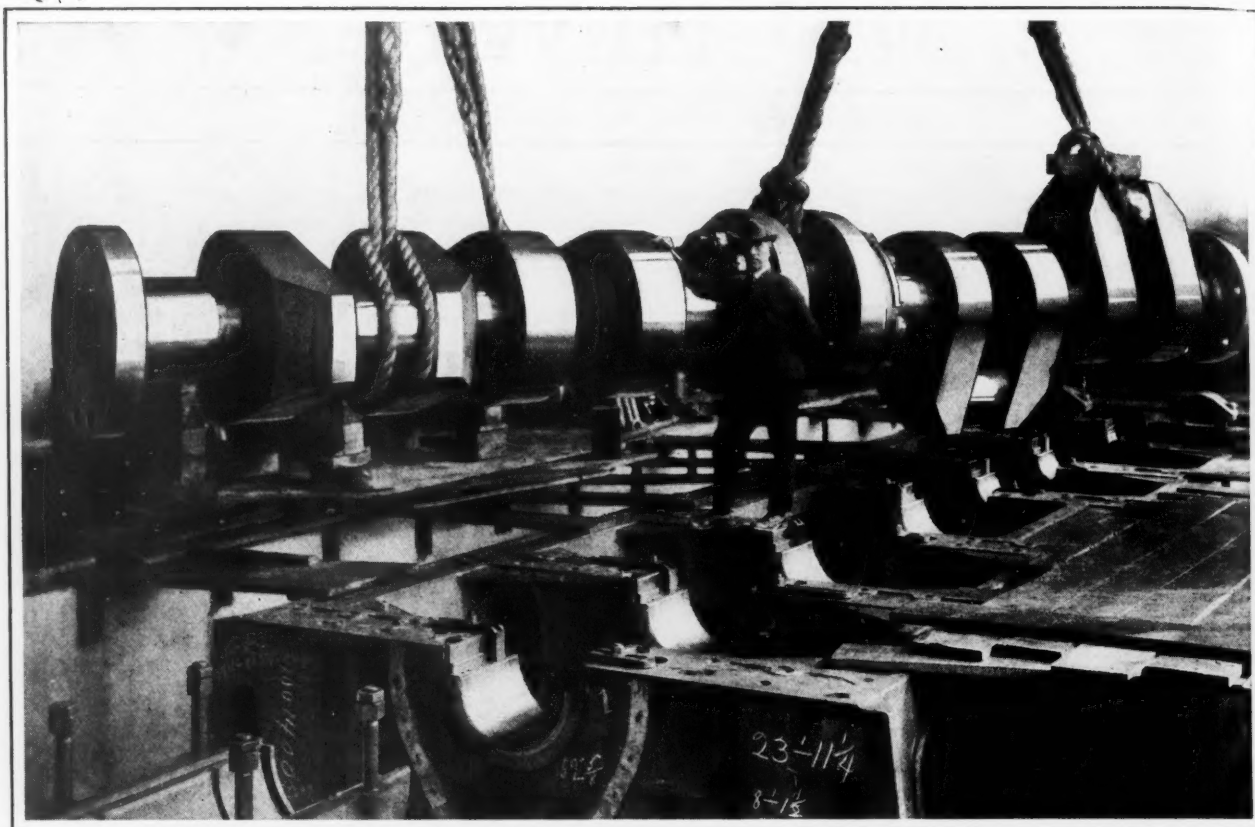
Crankshaft for the Largest Diesel Engine Ever Constructed in the United States—The Crankshaft Weighs 77,000 Pounds
